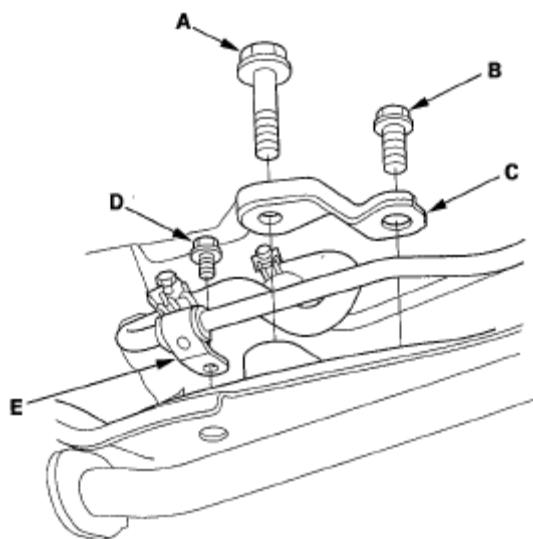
Identifying Rear Steering Gearbox Mounting Bolt, Stiffener Mounting Bolt And Stiffener
